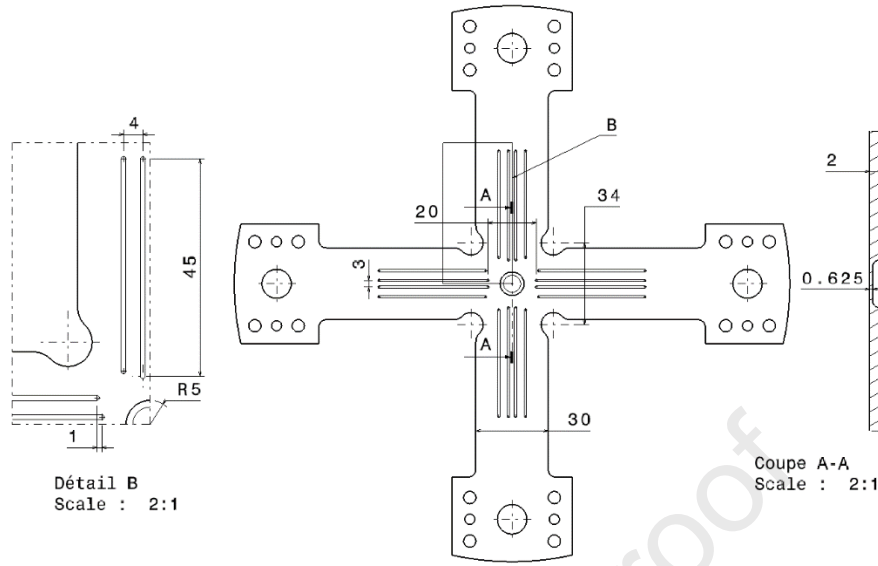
Cruciform specimen shape for in-plane biaxial tensile test.
